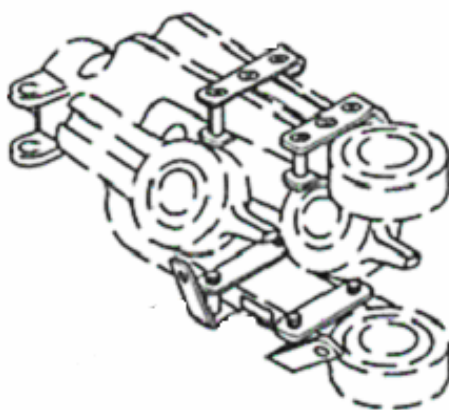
Tail Rotor Head Assembly (AH-64A/D)
